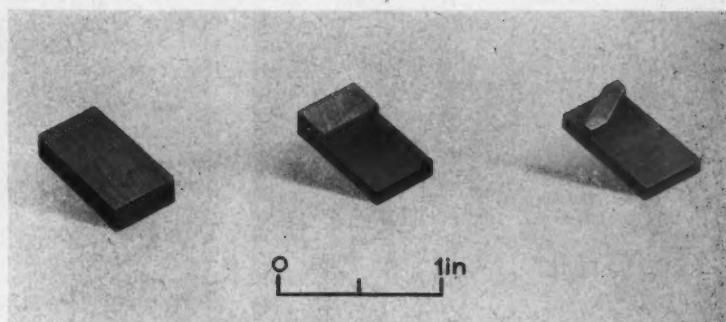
Clincher rams for wire-stitching machines are made from tool-steel blanks, as seen at the left. Components after the first and second milling stages, on a Fritz Werner machine arranged for pendulum operation, are seen at the centre and right respectively
